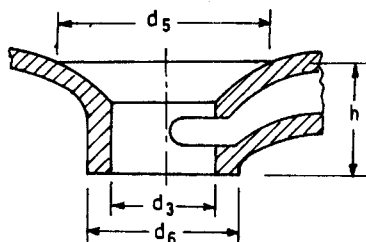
DIMENSIONS OF WASTE OUTLET HOLE
